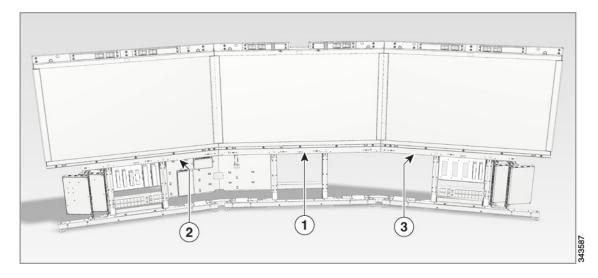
Facade Bracket Installation (2 of 5)—Installing the Screws Into the Display Assembly
